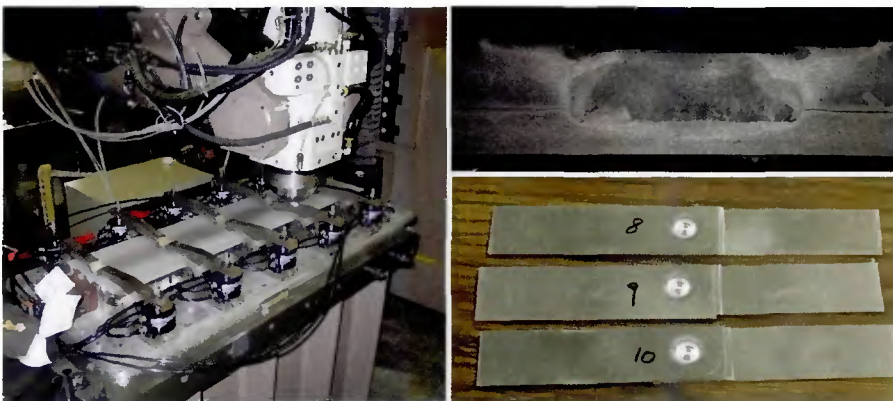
Refill friction spot welding (RFSW) using MTS ISTIR 10 system and custom-designed head adapter (left). RFSW lap shear coupons (right, bottom) and metallurgical cross section of RFSW showing complete joint penetration in 0.080-in.-thick 7075-T73 aluminum (right, top). Courtesy of South Dakota School of Mines.
